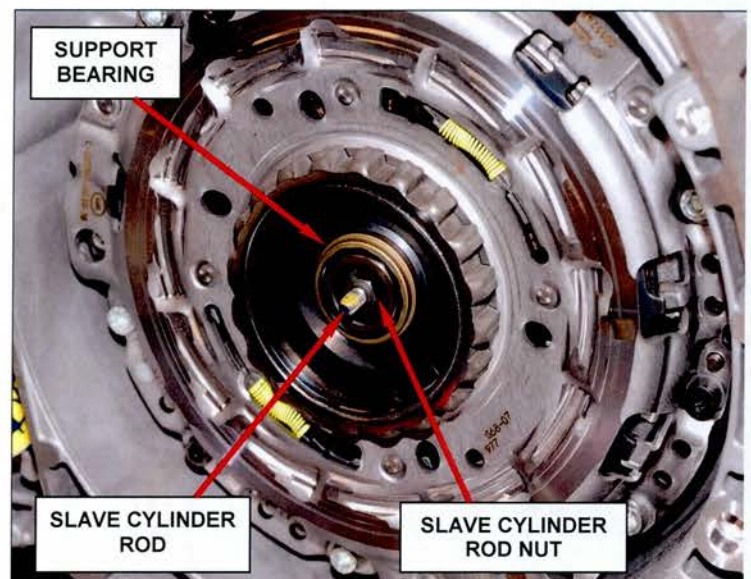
Slave Cylinder Rod Nut and Support Bearing
